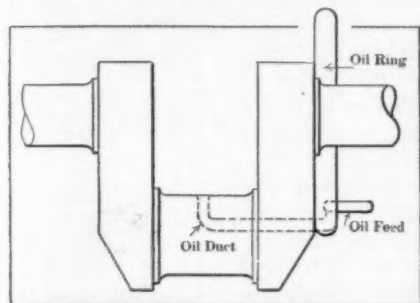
Method of fitting centrifugal oil ring to crank throw. The oil duct is shown
